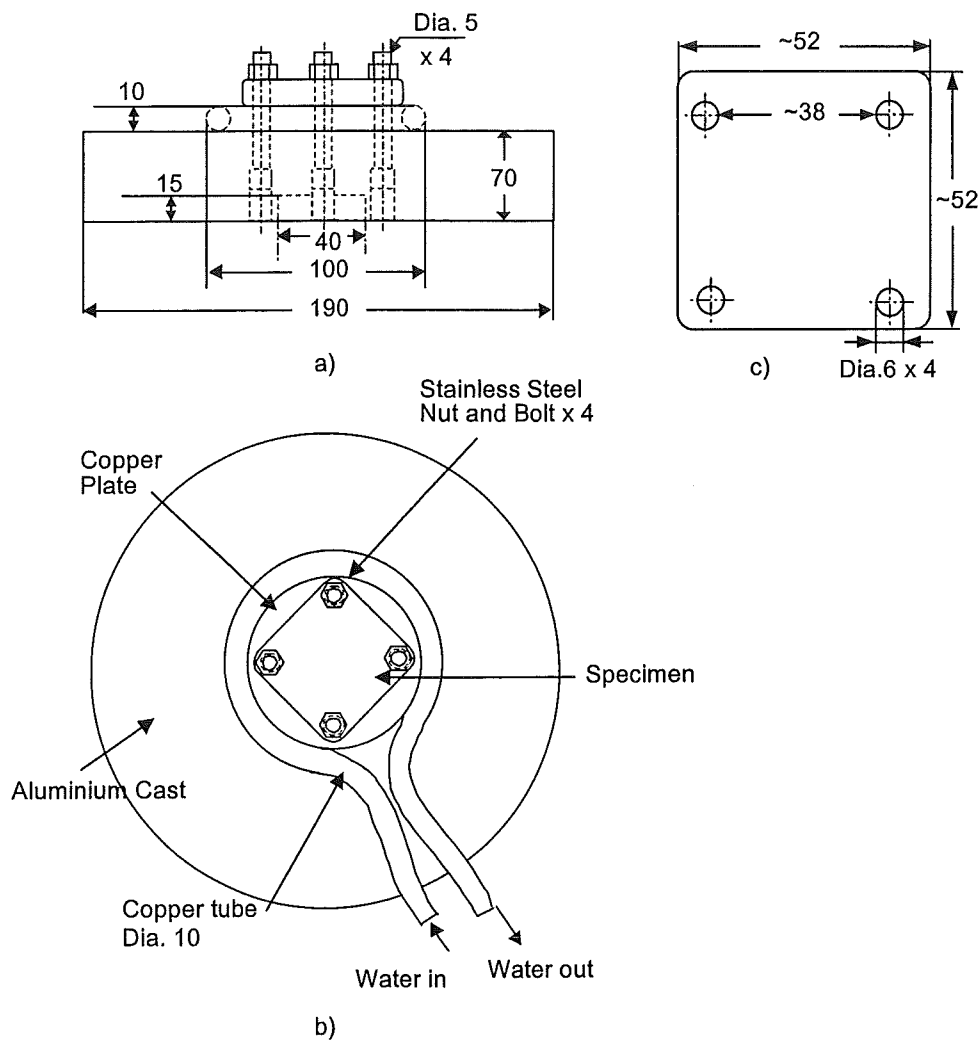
Detail of the CPT equipment a) side view, b) top view and c) the CPT specimen. All dimensions are in mm.
